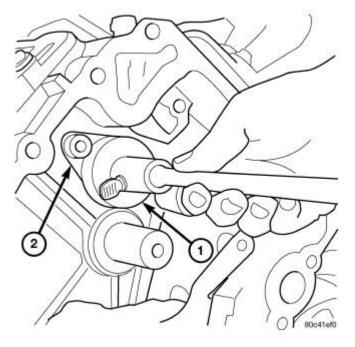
Counterbalance Shaft Removal/Installation Tool Courtesy of CHRYSLER LLC
